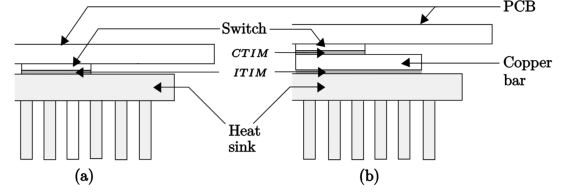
Heat sink assembly diagram (a) assembly I, (b) assembly II.
